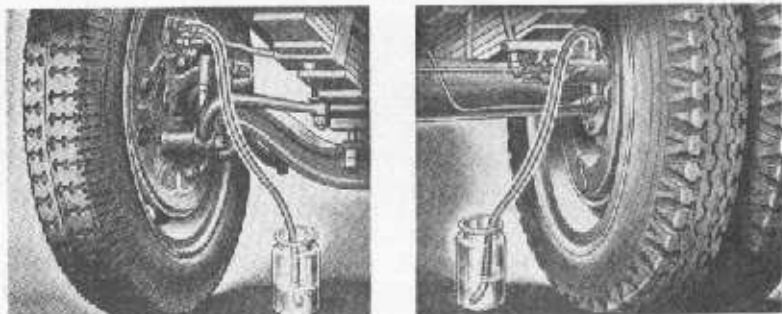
Bleeding the hydraulic brake system—(left) front brakes; (right) rear brakes.
